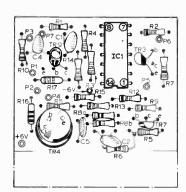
Component layout on the printed circuit board of amplifier "A"
